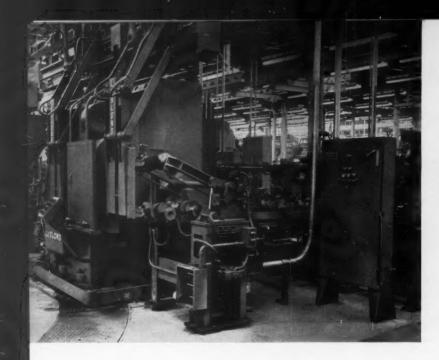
Automation device at the right of double-spindle lathe stacks crankshafts two high for automatic double loading of machine. Unloading is done in same way.
